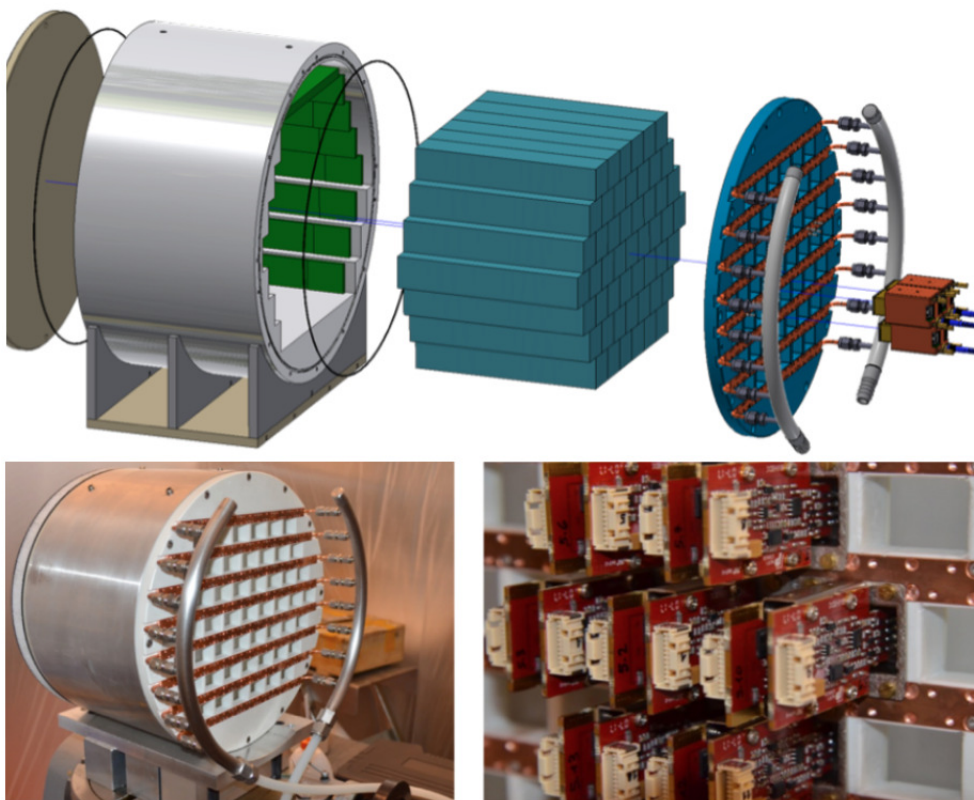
Top: Module0 exploded view showing the chassis, the crystals, the back plate with cooling lines and some SiPM/FEE modules. Bottom: Module0 assembled and detail of the FEEs on the back plate.
